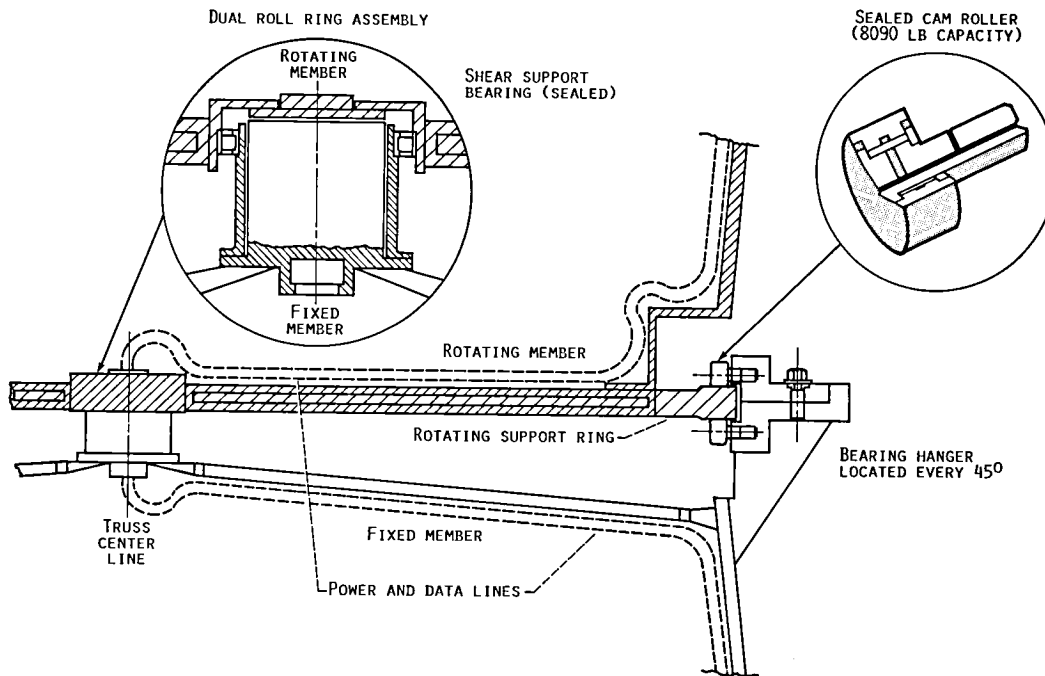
ALTERNATE CAM BEARING SUPPORT SHOWING DECOUPLING OF MOMENT AND SHEAR LOAD SUPPORT FUNCTIONS.
